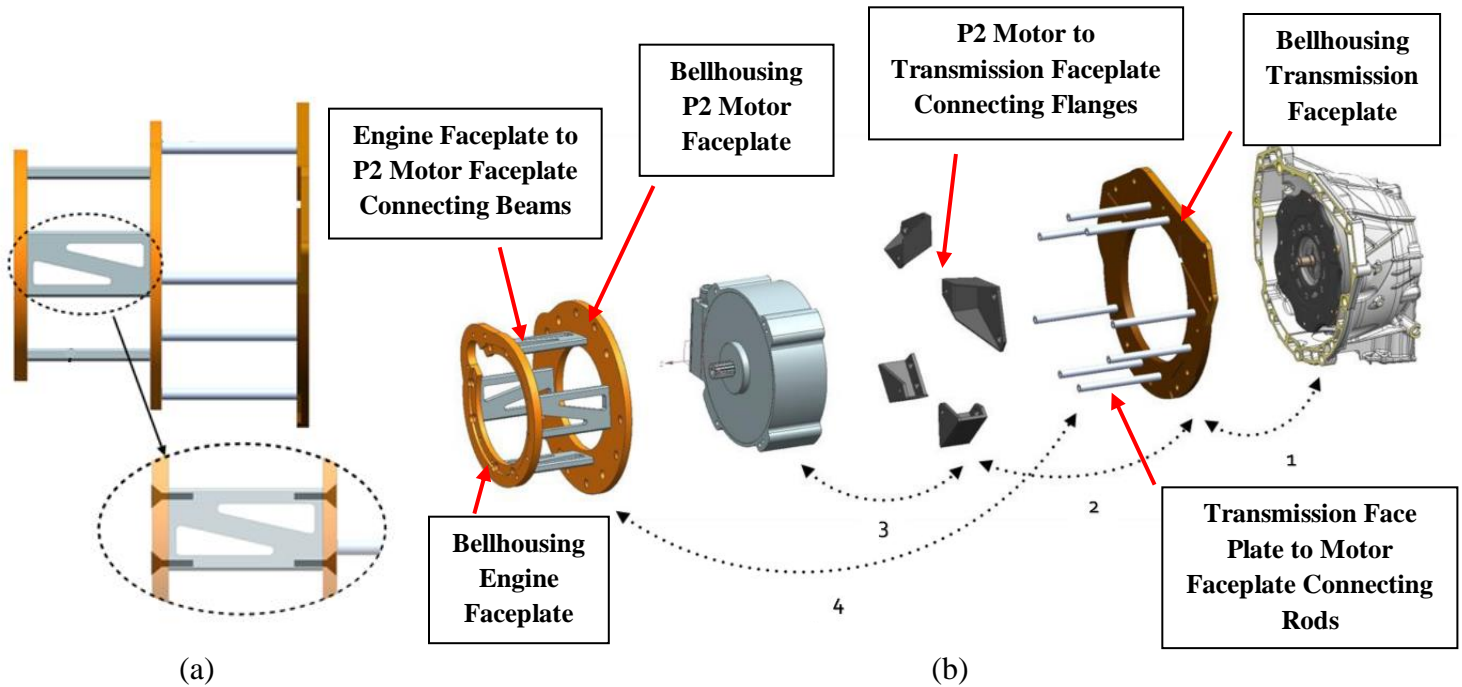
Actual Custom Bellhousing Assembly – (a) side view of custom bellhousing, (b) custom bellhousing assembly
